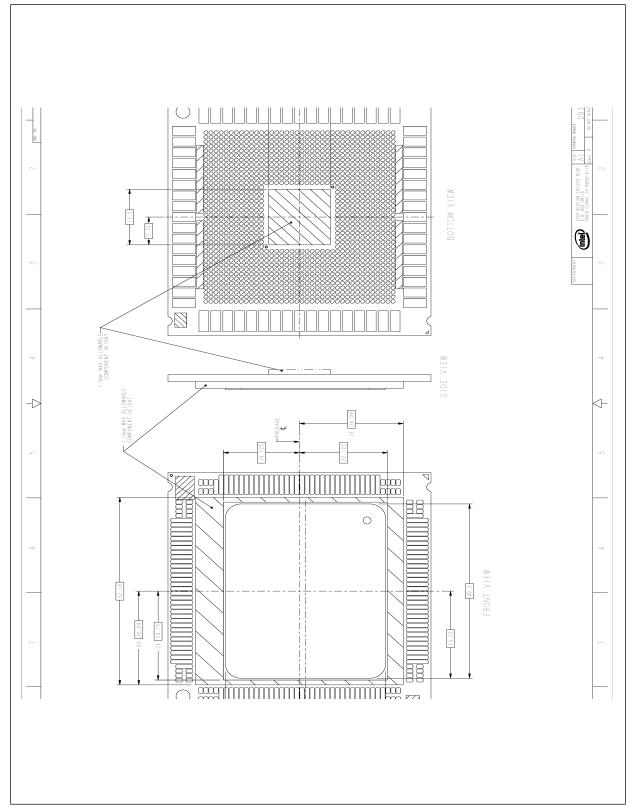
Intel[®] Itanium[®] Processor 9300 Series Package Drawing (Sheet 3 of 4)
